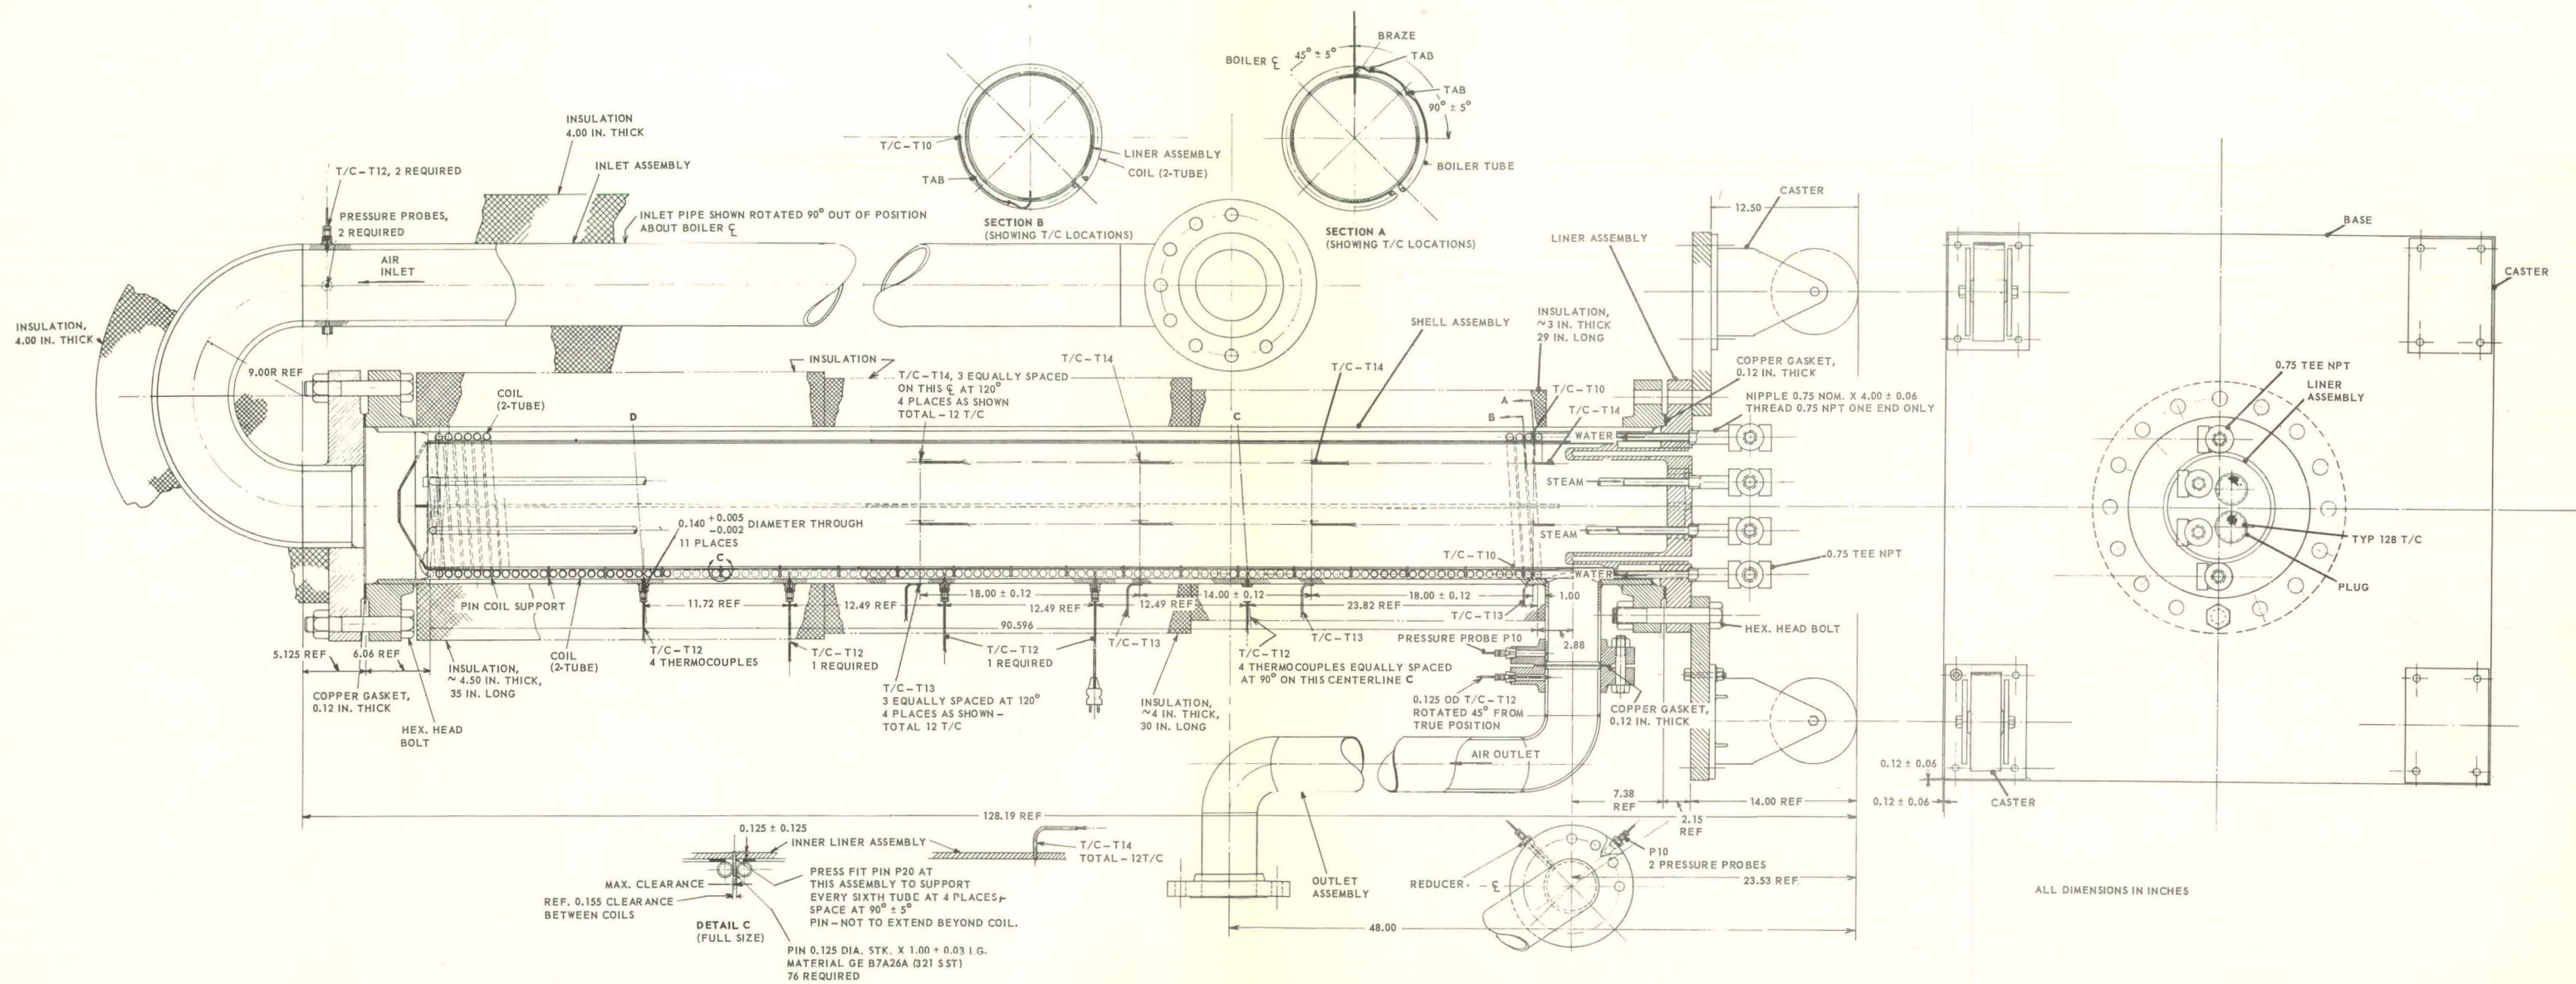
Boiler assembly (Dwg. 219R847)
